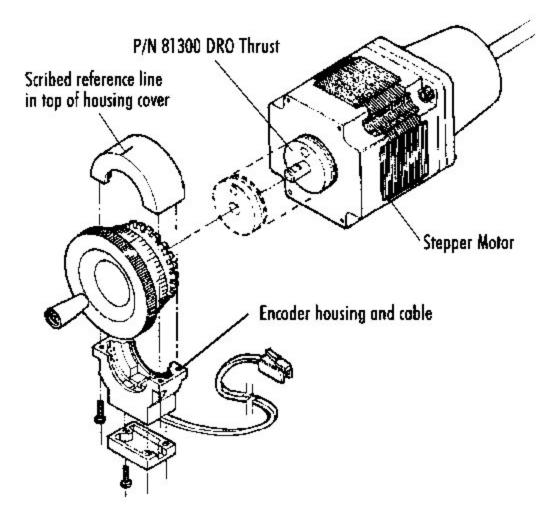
Grooved thrust collar from the DRO is shown glued to the back of the stepper motor. Note position of groove closest to stepper motor.
